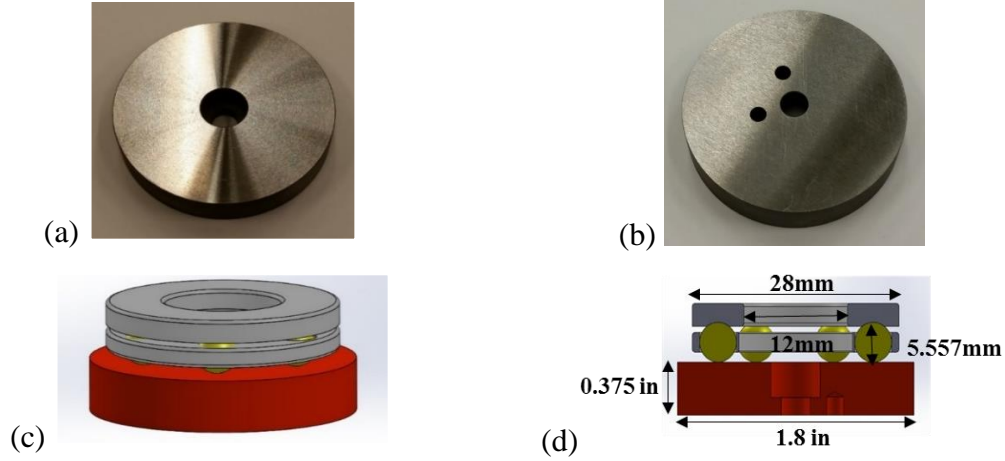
Flat specimen geometry: (a) testing surface, (b) bottom surface, (c) CAD model of thrust ball bearing, (d) section view of CAD model
